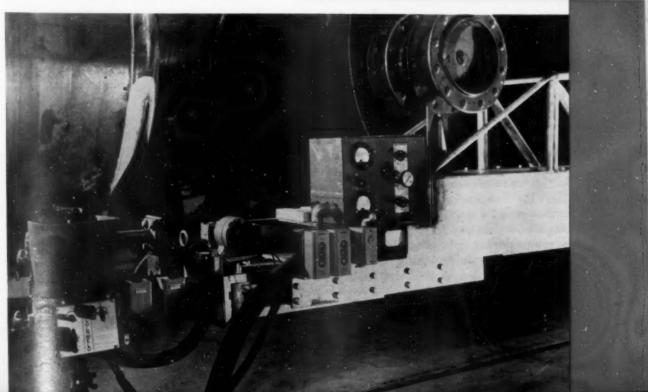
(right) Boom extension set up for welding inside a tank shell. Controls include those for welding and for adjusting the speed of tank rotation.
